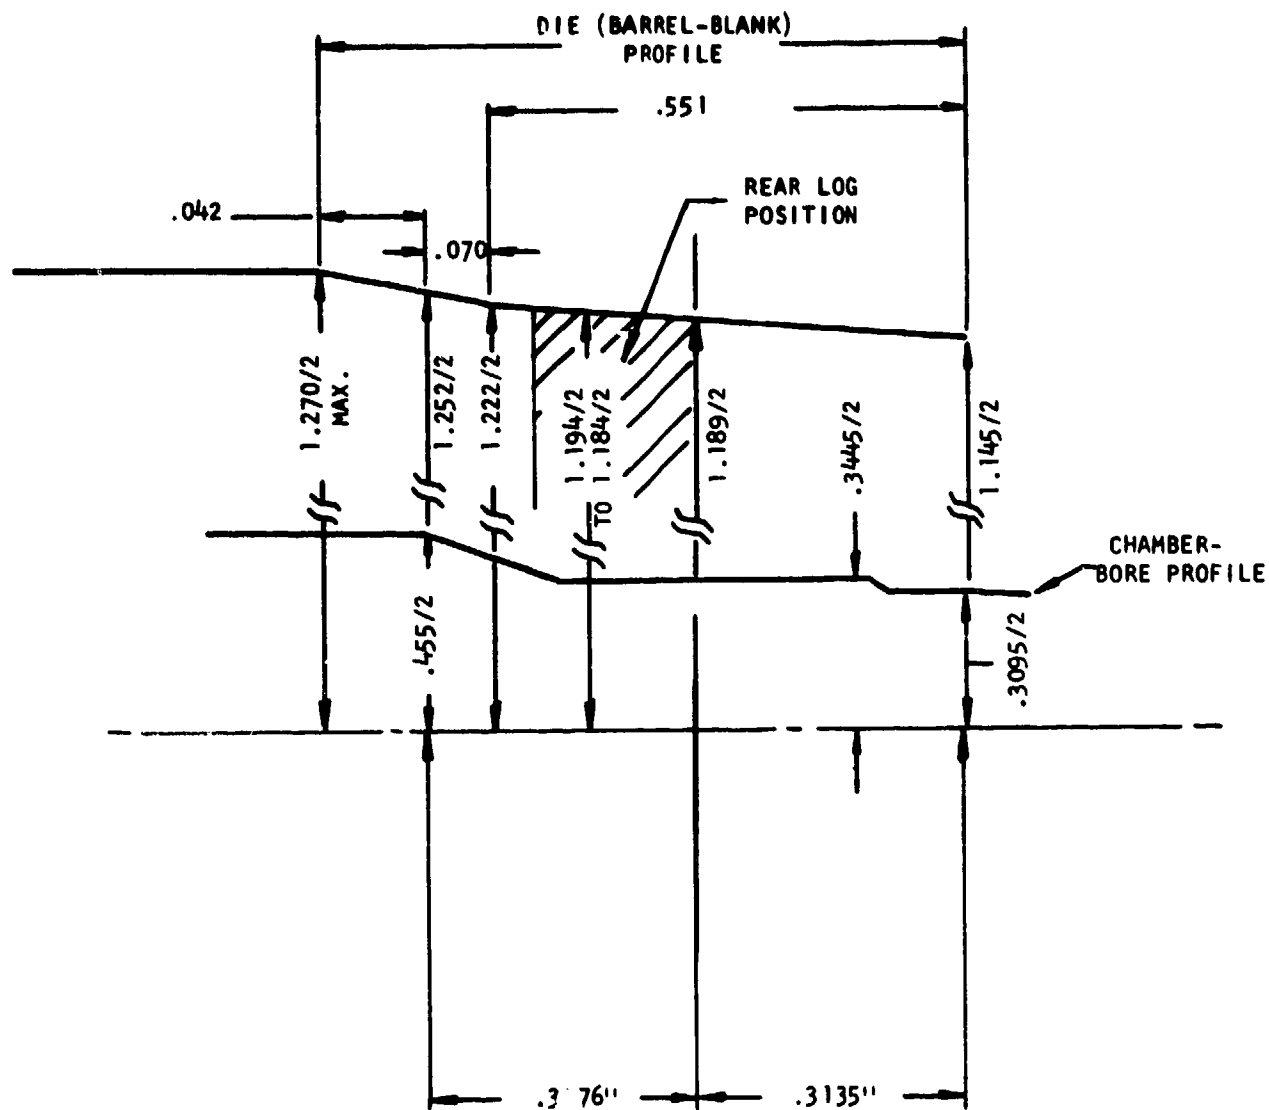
Chamber Cross Section for Forging M-134 Blanks from a 1.400 Inch Diameter Preform (Dimensions Controlled by Cam Settings When Forging with or without O.D. Contouring).
